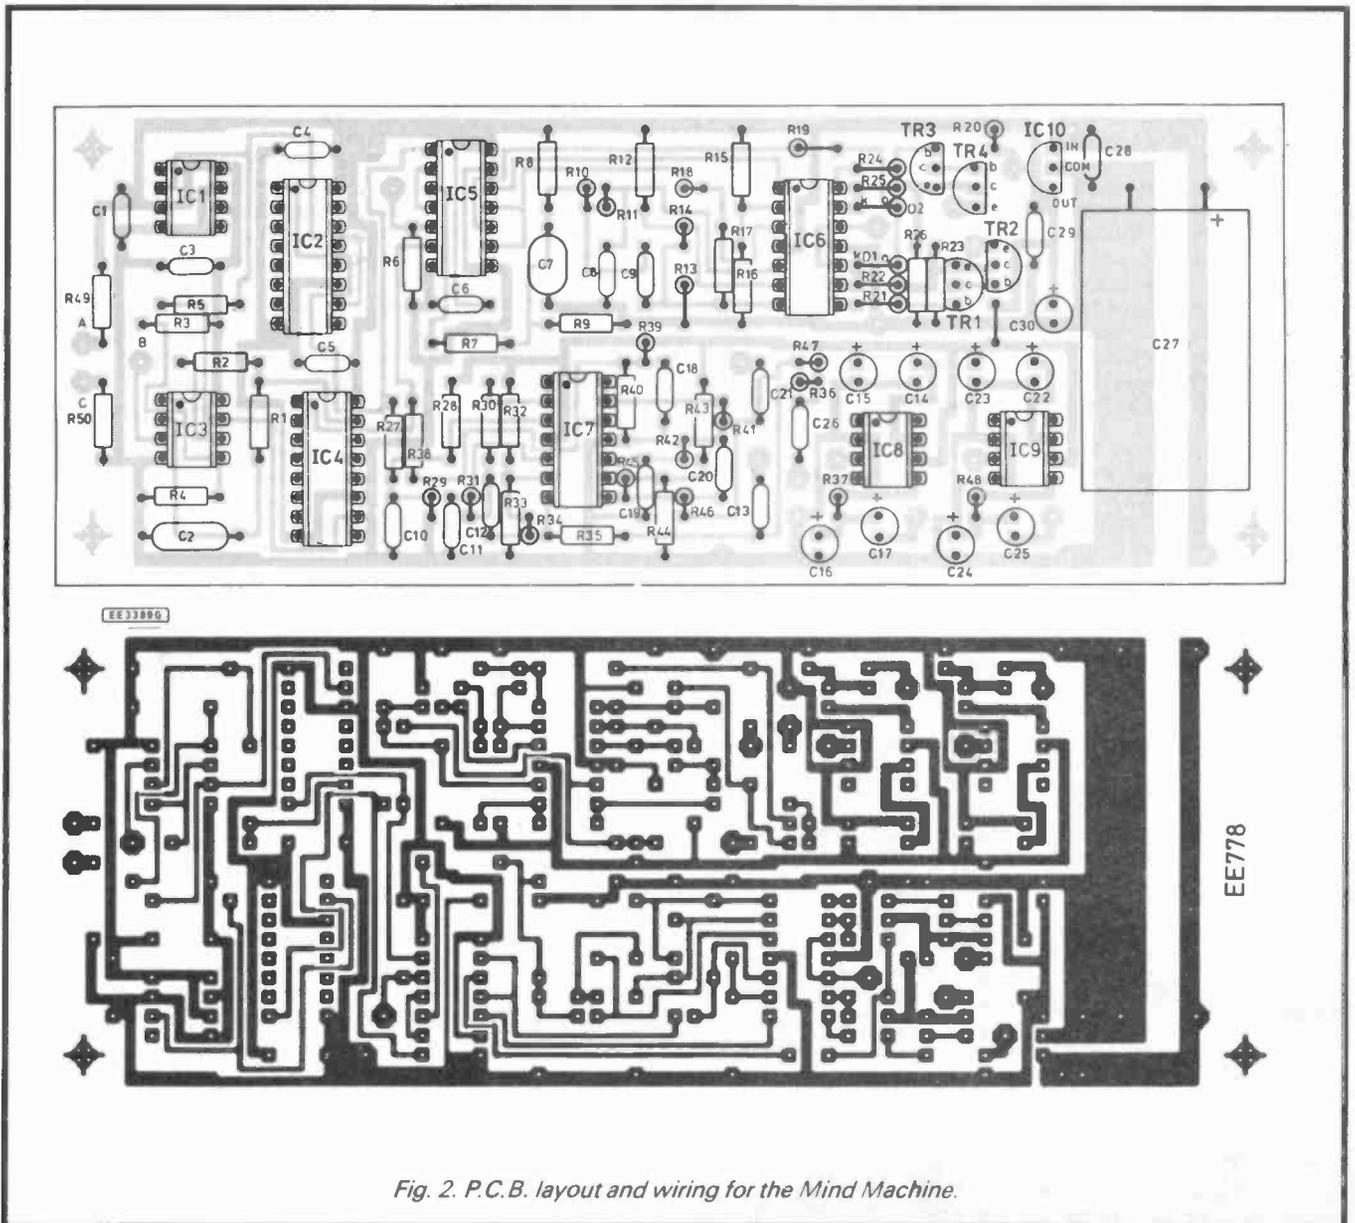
P.C.B. layout and wiring for the Mind Machine.
